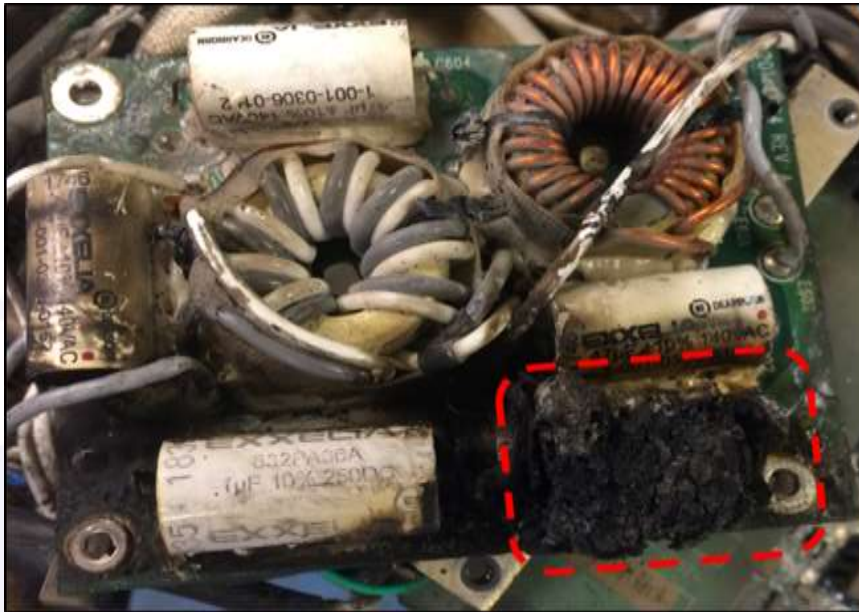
Detail printed circuit board for severely damaged capacitor C601.
